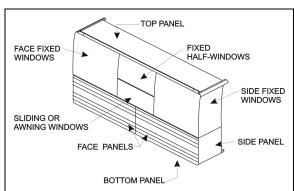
SLIDE-OUT PANELS AND WINDOWS
